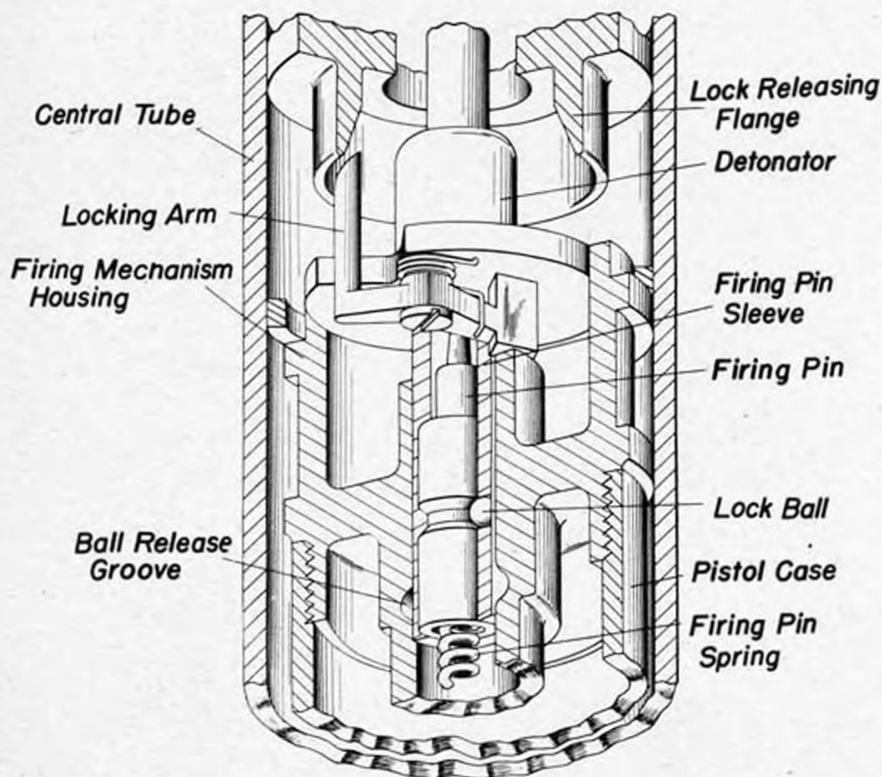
Firing Assembly, Type 95 Depth Charge, Sectional View in Elevation
